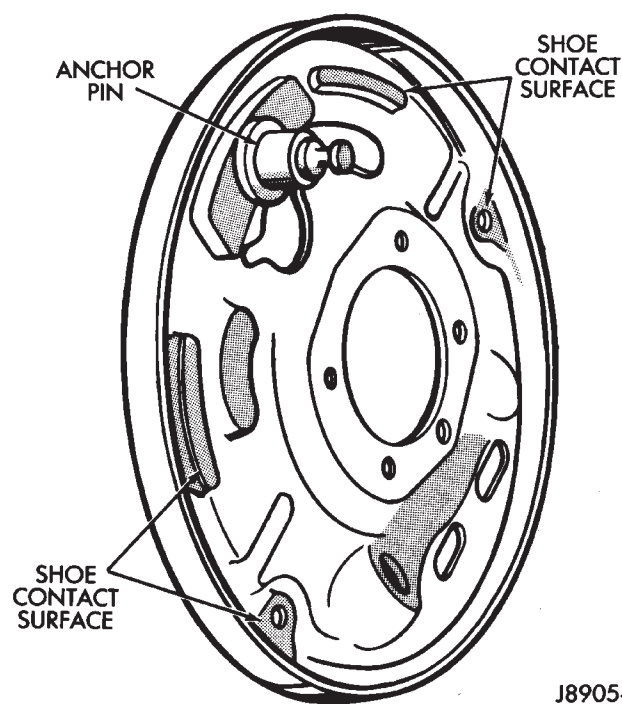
Shoe Contact Surfaces (10-Inch Support Plate)
